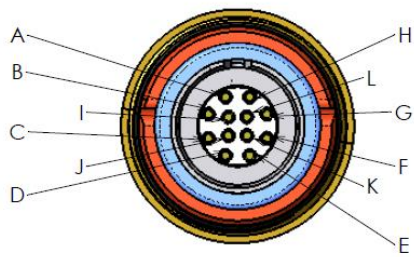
QL40-IS1 and IS2 Bridle bottom connection to tool Figure 9-4 QL40-IS1 Bridle top connection to cable head
